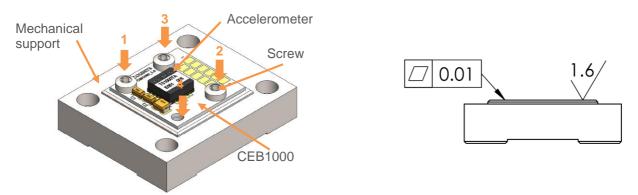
Ceramic Evaluation Board mounting (left) and mechanical reference surface (right)
